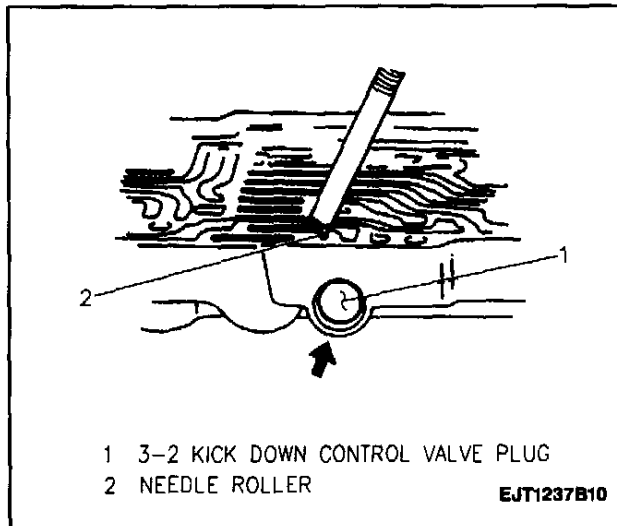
Removing 3-2 Kick Down Control Valve Plug (03-72LE, 4-Speed)
